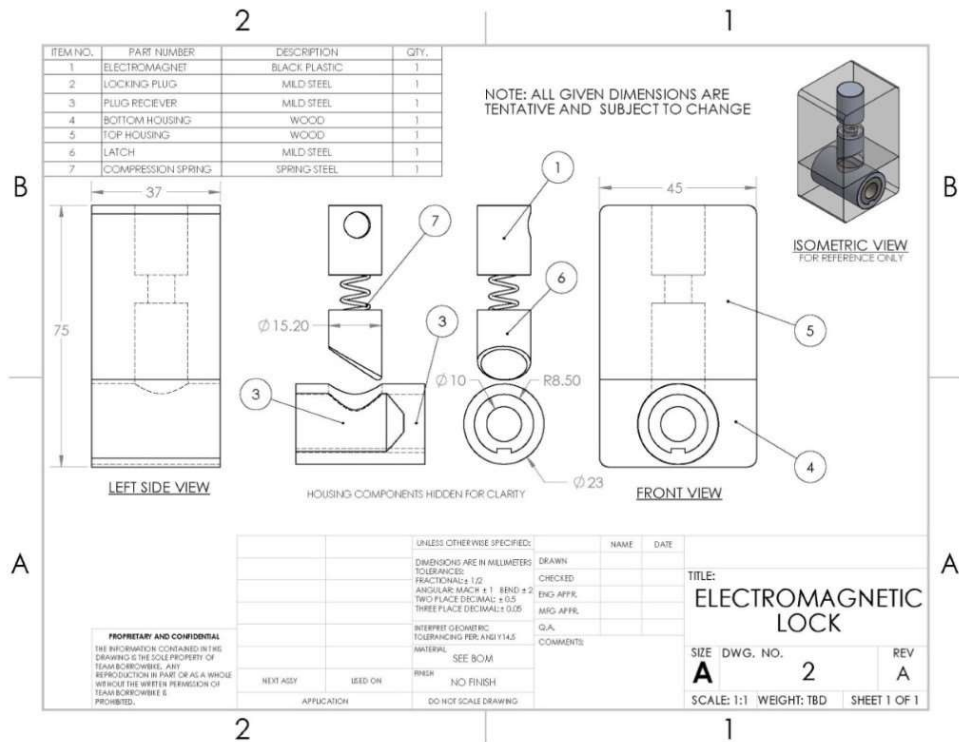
The figure above depicts a detailed drawing of the electromagnetic lock assembly showing major components such as the magnetic lock and locking latch.
